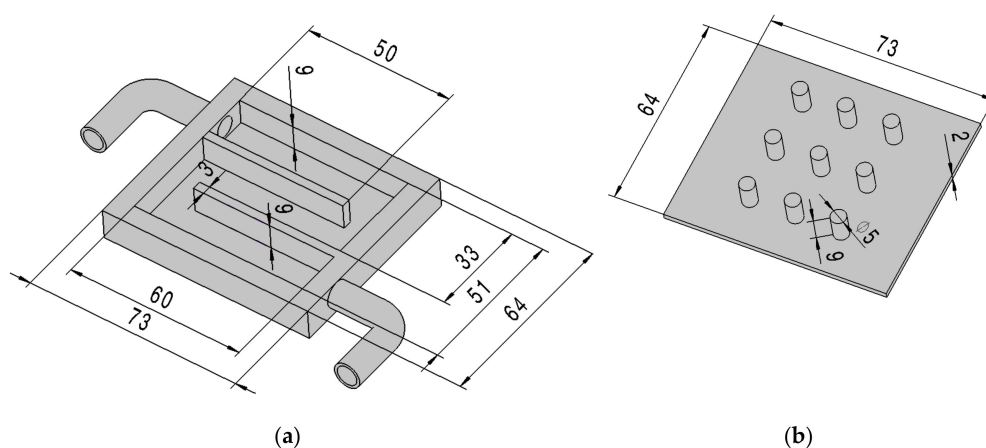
(a) Dimensions of the cooling block; (b) dimensions of the finned plate cover.
